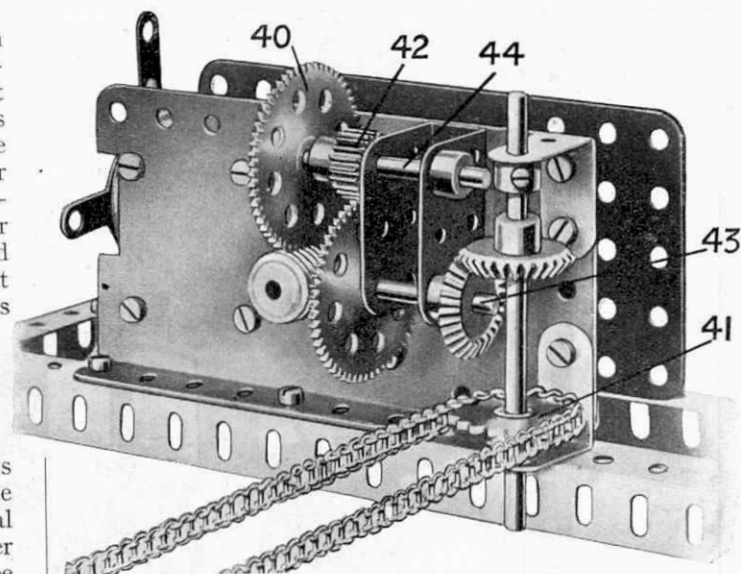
Sectional view, showing gears mounted on Electric Motor 2 of No. 109; 16 of No. 119; 8 of No. 125.
